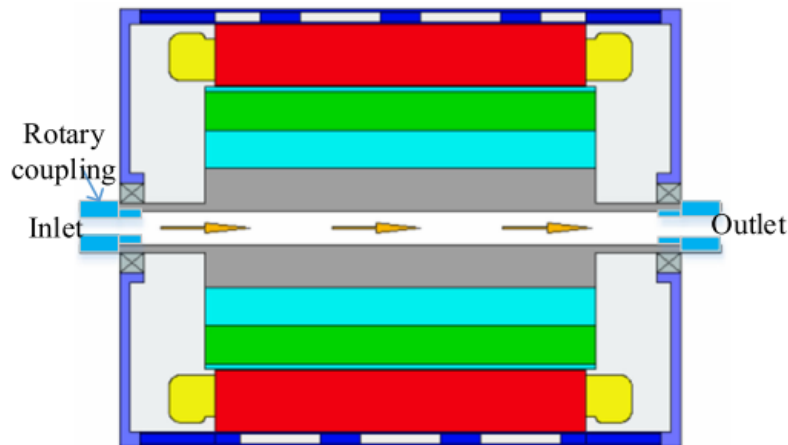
Concept of the rotor cooling using a hollow shaft [109].
